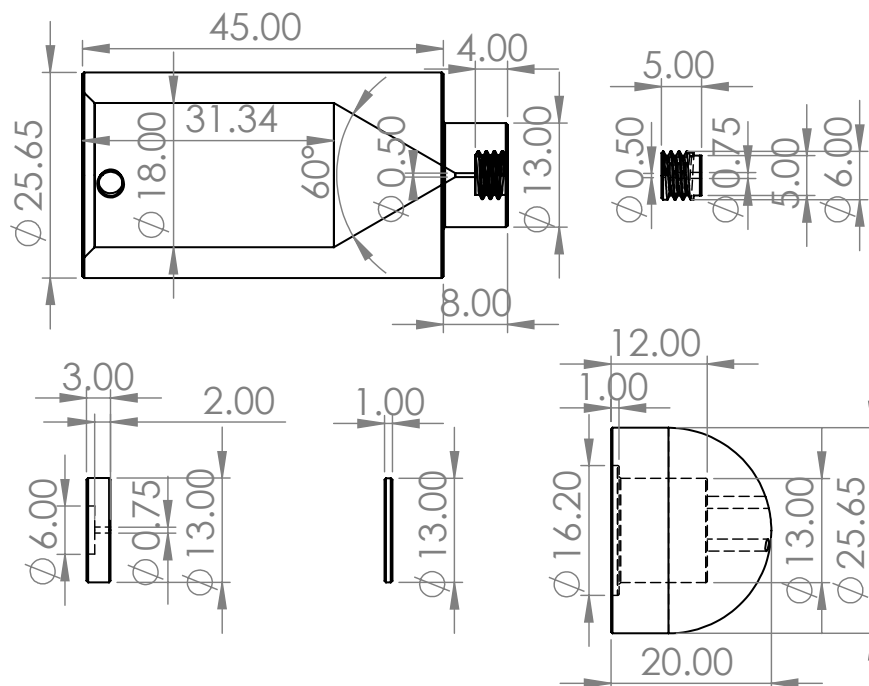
Technical drawing of the rotor packing tool designed for use with the Bruker rotor handling toolkit.
